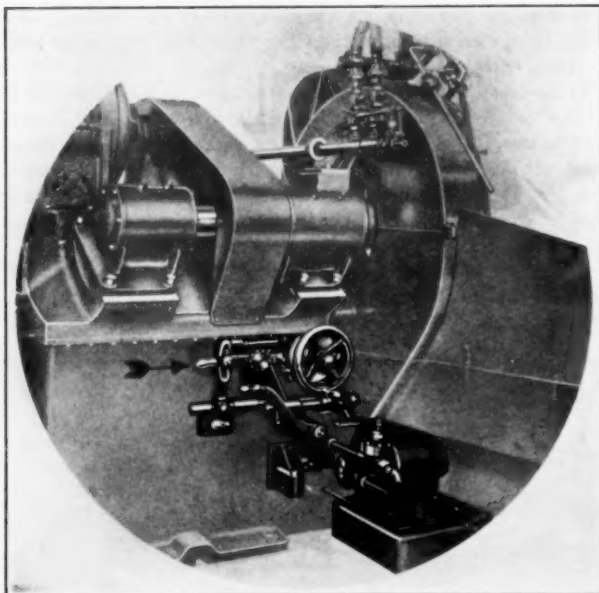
HYDRAULIC CONTROL ON GRINDING MACHINE
